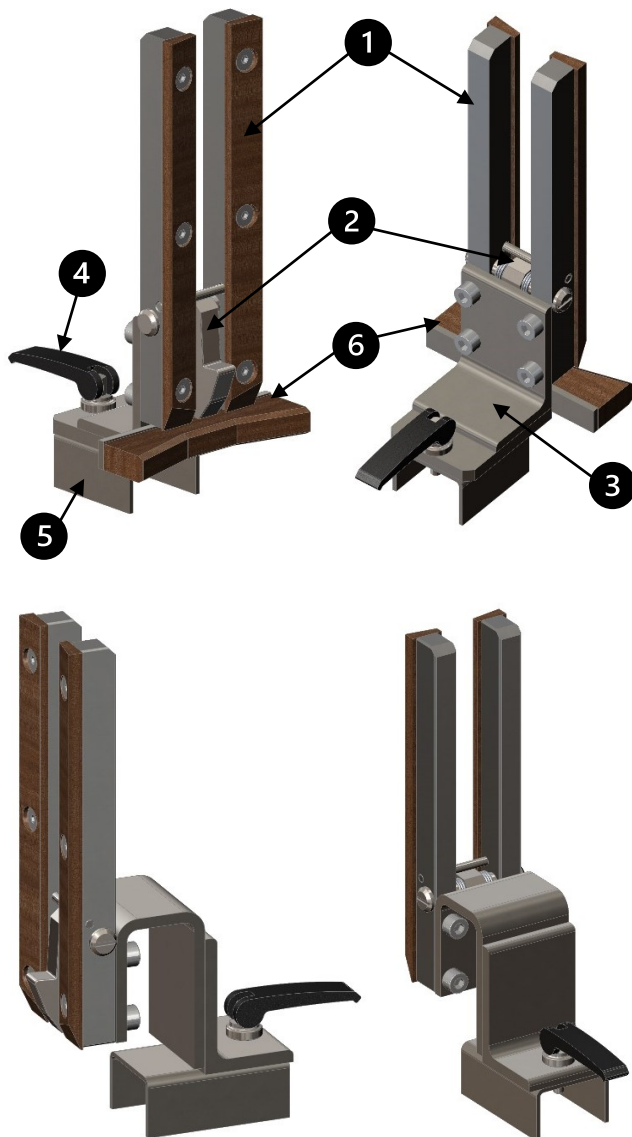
Top – front holder. Bottom – Side holder. (1) Support ribs. (2) Spring-loaded latch. (3) Bracket. (4) Clamping handle. (5) Guide brace. (6) Part stopper.
